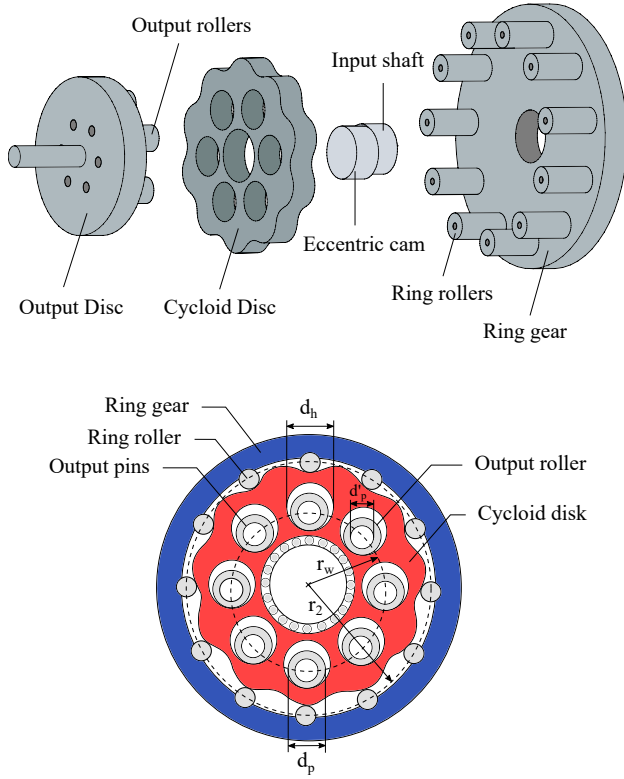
Exploded view of the different parts of a cycloid drive (top) and a detailed cross-section view of the cycloid drive (bottom) together with all the parameters needed to describe it.
